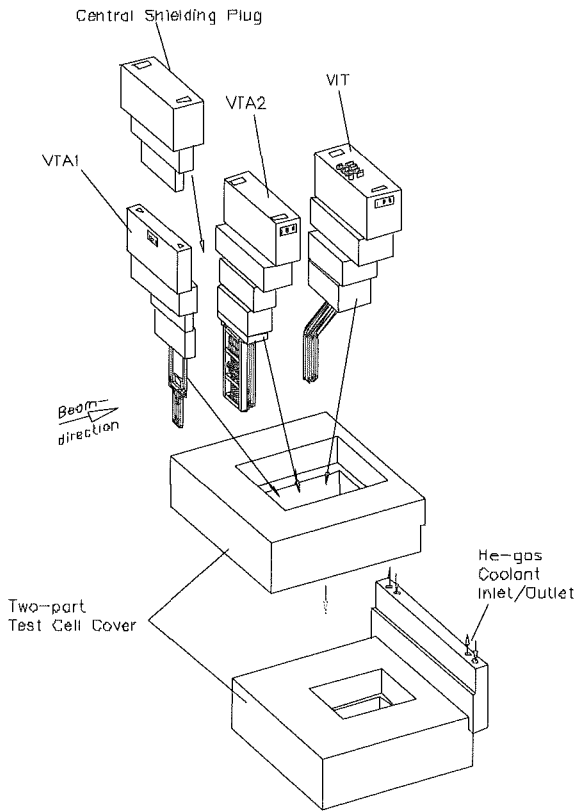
Explosion view of the VTA's, VIT and the reduced size two part test cell cover.
